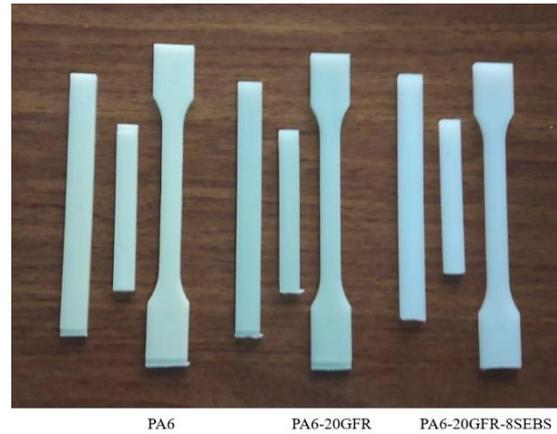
Image of tensile, impact and bending test samples produced by injection molding method
